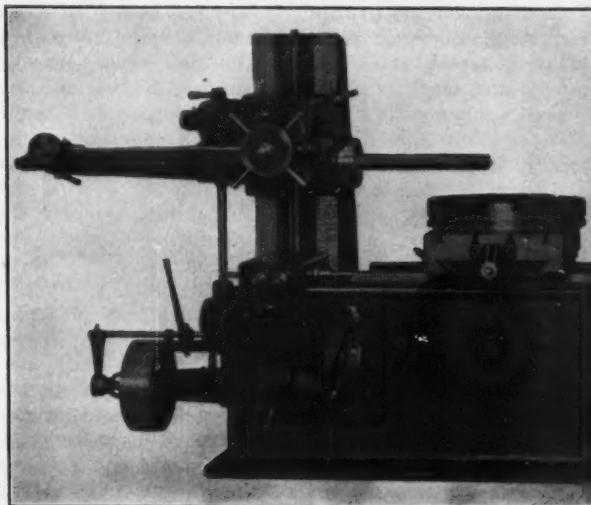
Front View of the Horizontal Boring Mill Built by the Cleveland Machine Tool Works, Cleveland, Ohio.
